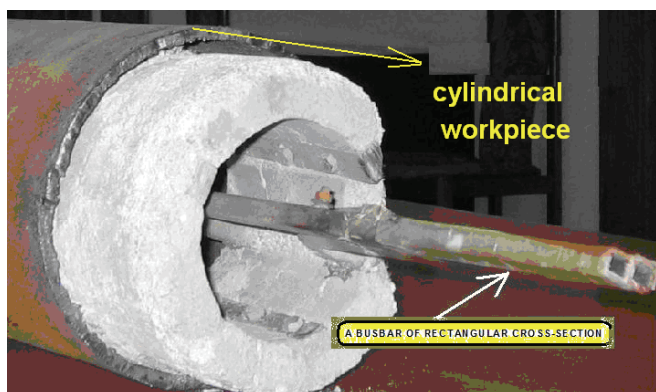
Real system consisting of a cylindrical workpiece with an internal inductor
